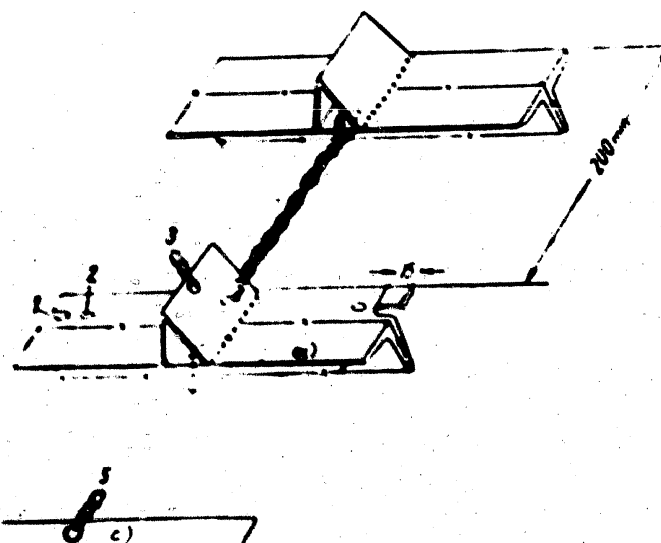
Chain with Tracks Welded of Angle Irons
